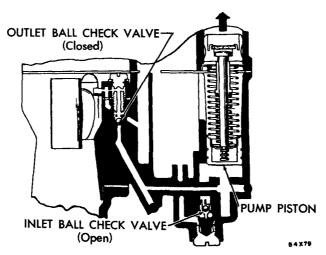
Accelerating System (Pump Piston "Up") (AAVP-2 Carburetor)
